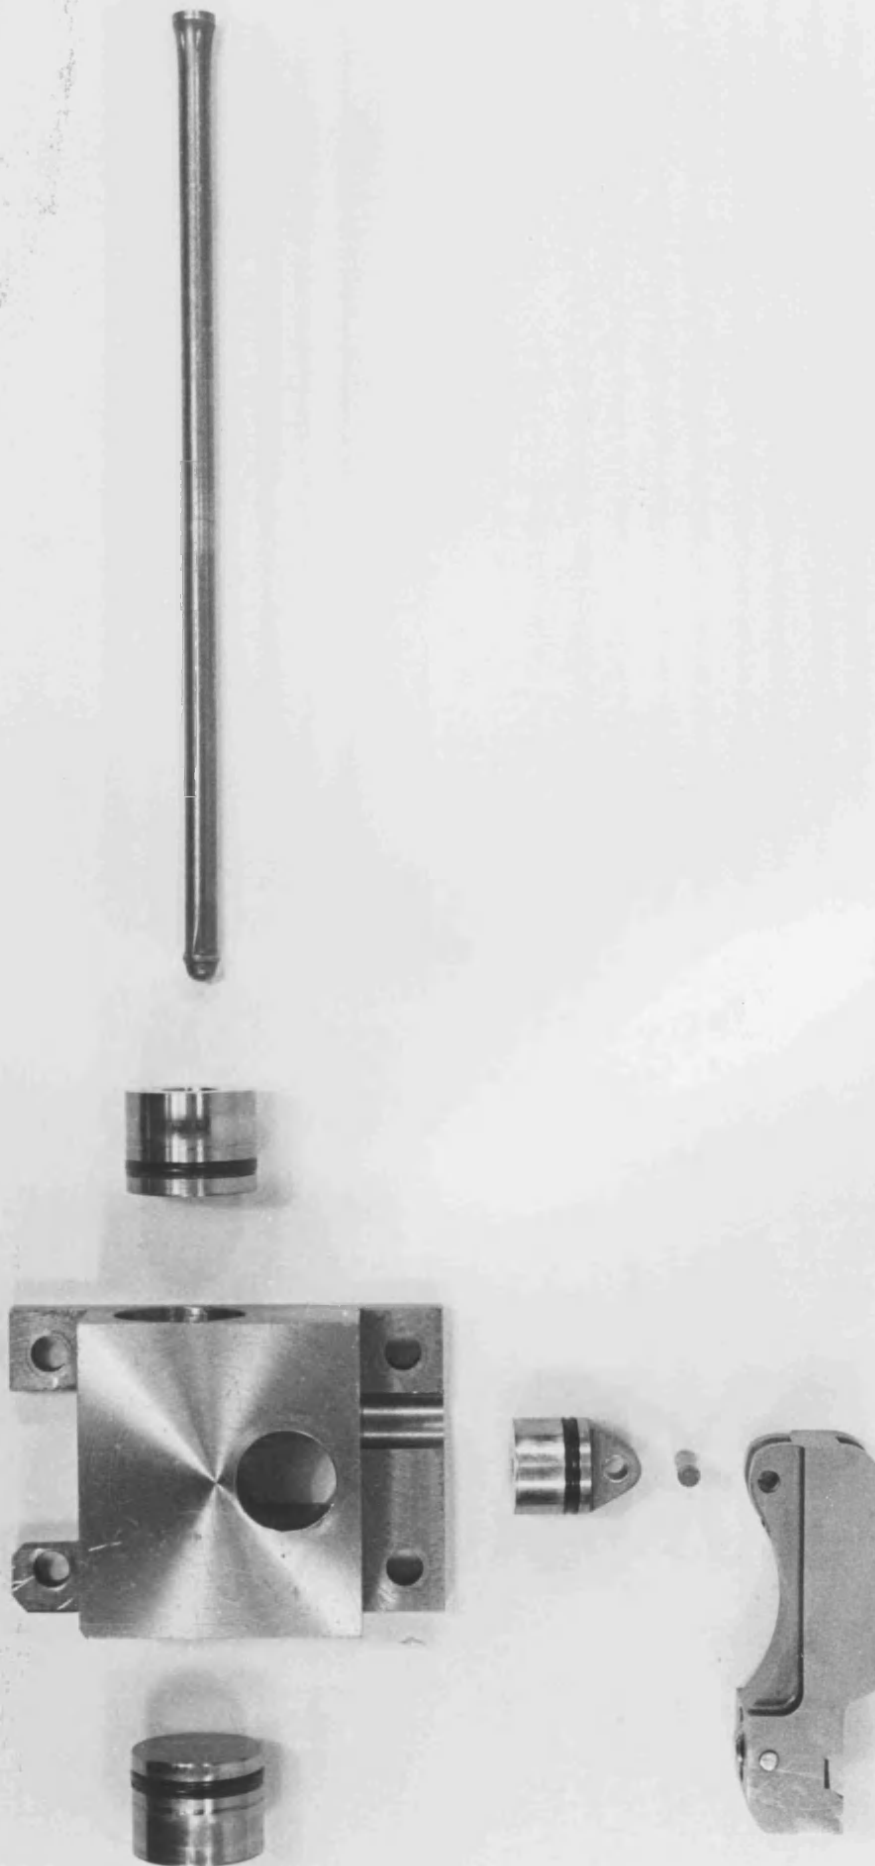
Exploded view of the mechanism with a mild steel hydraulic chamber.
